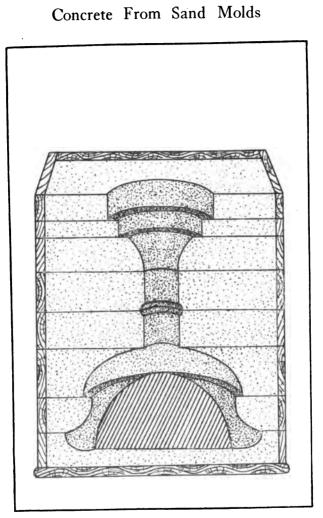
Sand Molds Combined to Mold a Large Lawn Vase.
